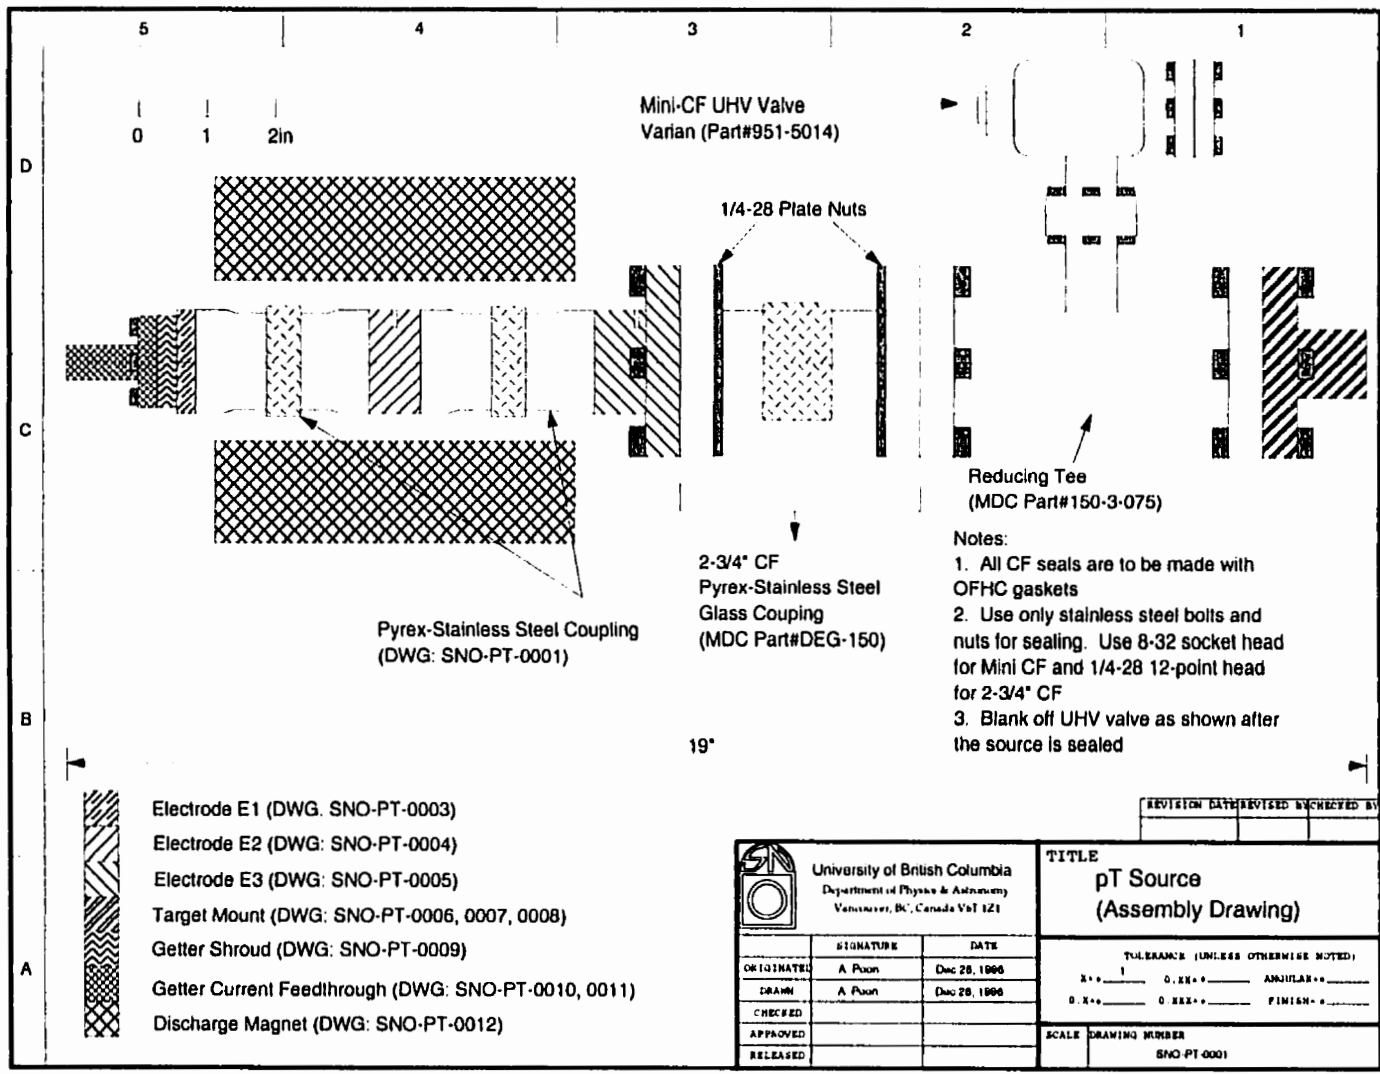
Assembly drawing of the  $pT$  source. Mechanical drawings of the parts can be found in subsequent figures.
